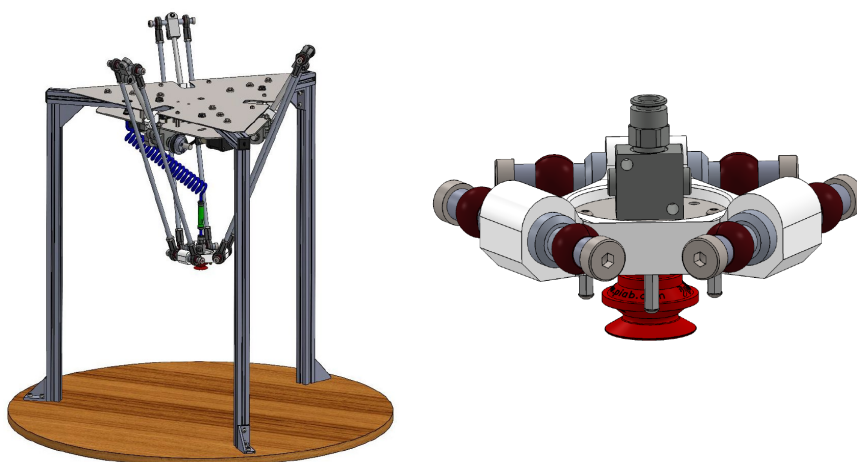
CAD model of the delta robot structure and robot gripper with vacuum ejector.
